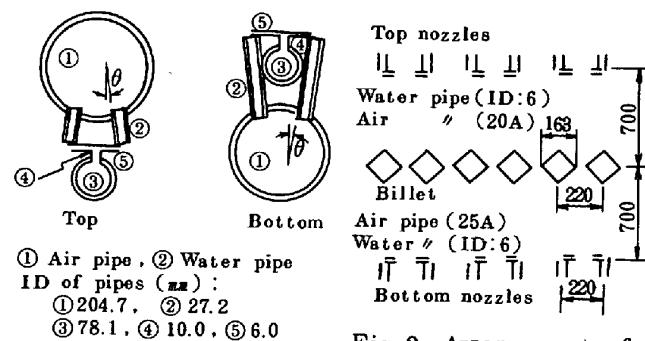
Arrangement of billet and nozzle (Unit: mm)
